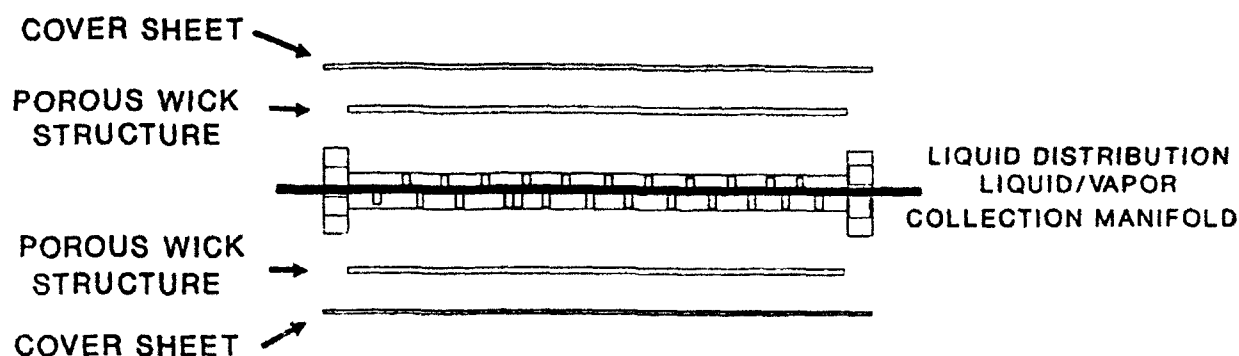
Actively Pumped Capillary Evaporator (Exploded View)
